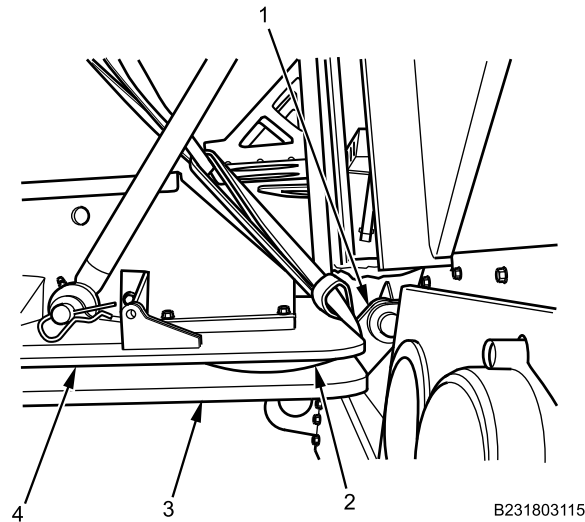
Loop Lifting Sling Around Door/Ramp Right Hinge.
